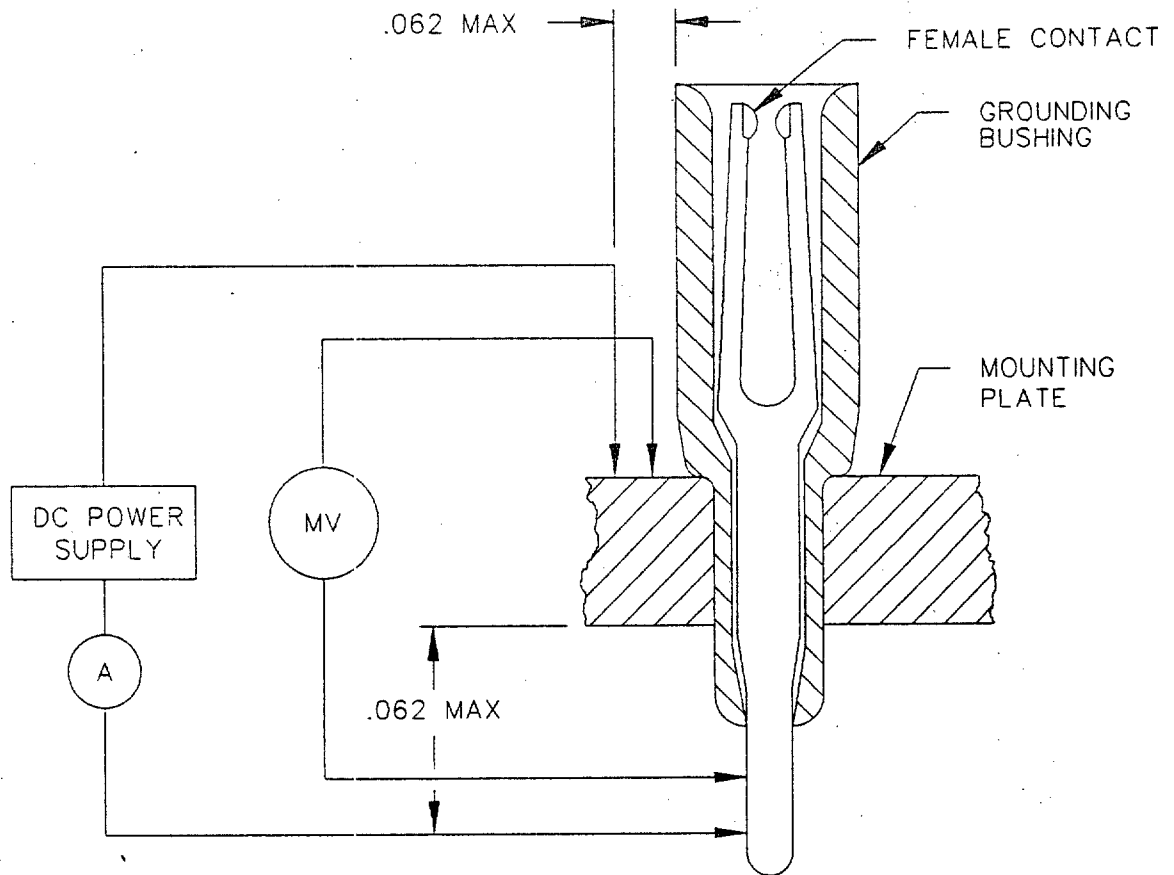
Test setup for measuring mounting plate to contact resistance on a single layer backplane.
